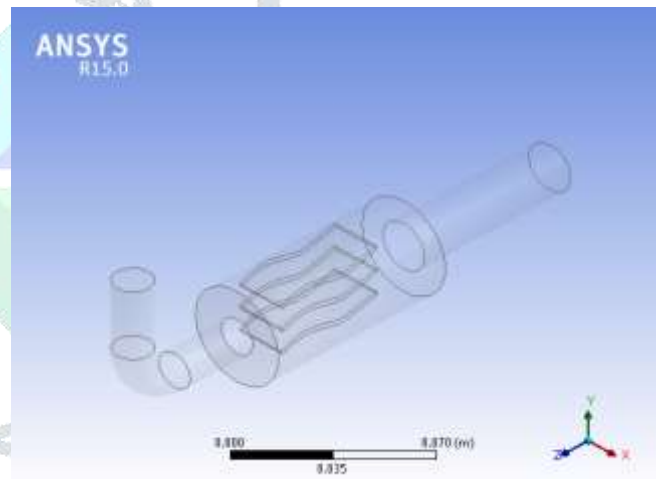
(b): 3D Model of Metal wavy planes shaped fluidized bed cooling tower.
